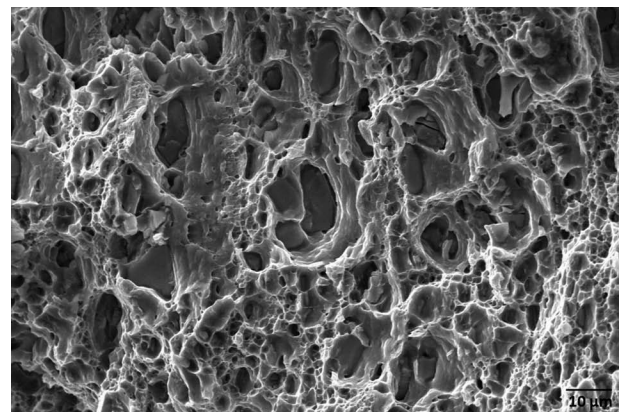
Higher magnified image of the fracture surface shown in Fig. 73
